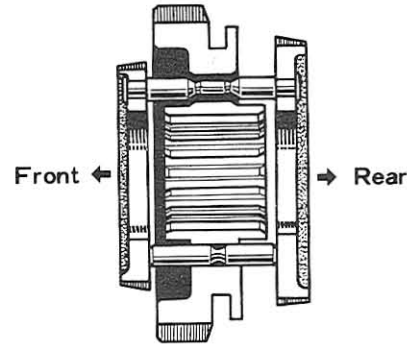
Synchronizer Ring G2433 No. 1 Direction
